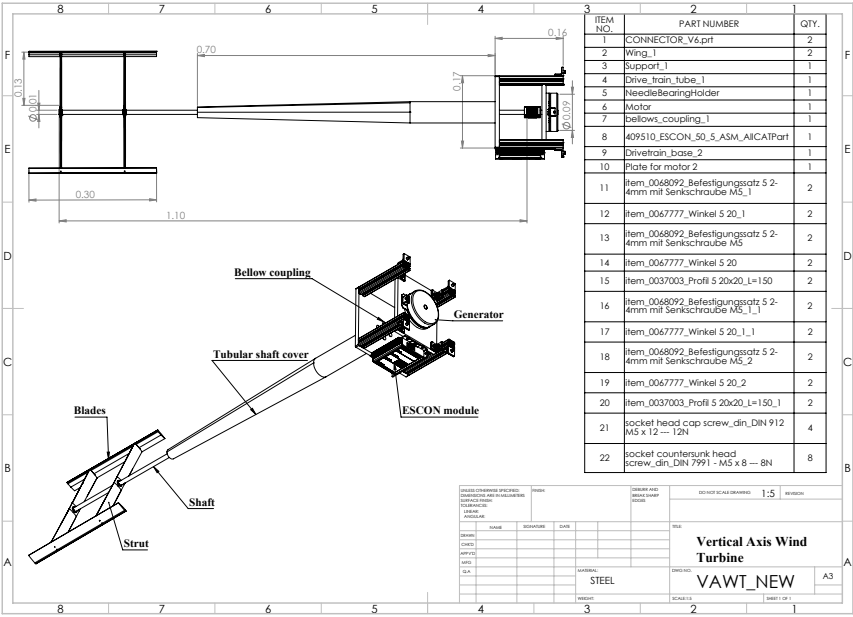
Detailed CAD drawing of Vertical Axis Wind Turbine design
